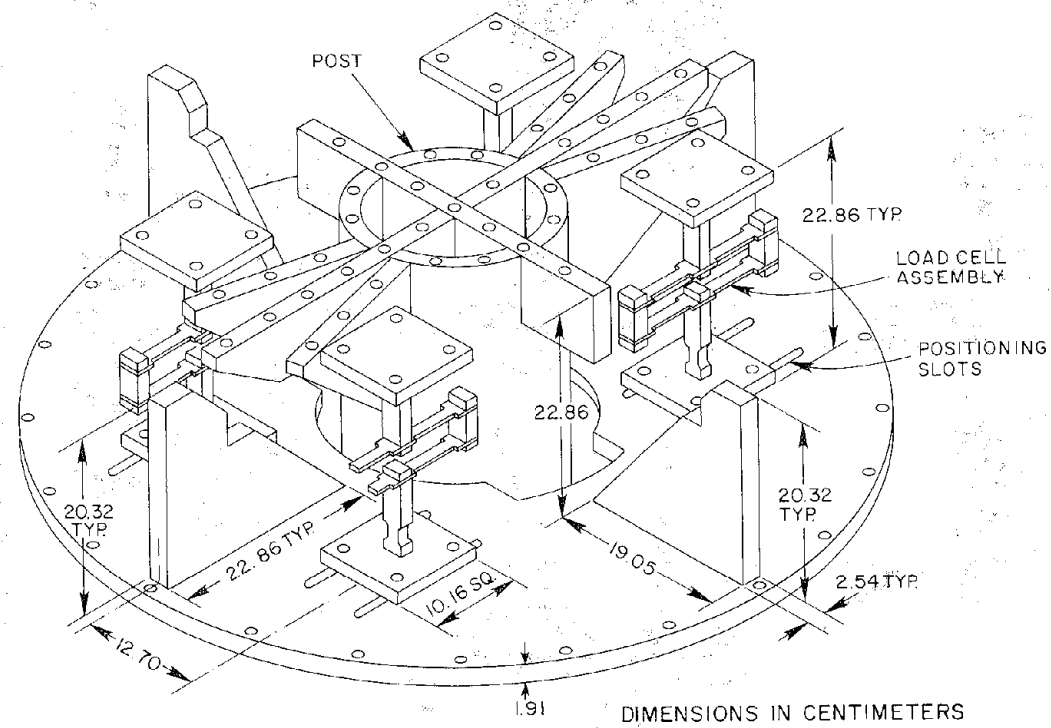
FOUNDATION LOAD CELL ARRANGEMENT
